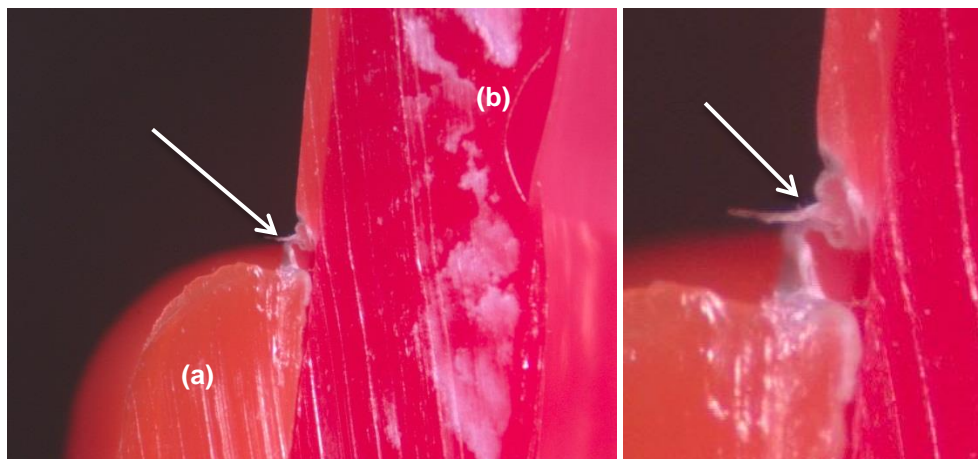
Shock tube holder (a) and main body (b) interface failure
